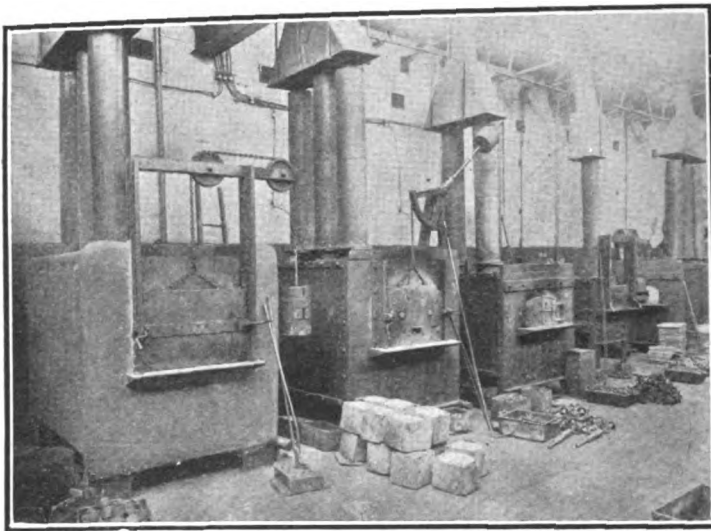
MODERN HEAT-TREATMENT SHOP EQUIPPED THROUGHOUT WITH GAS FURNACES.
